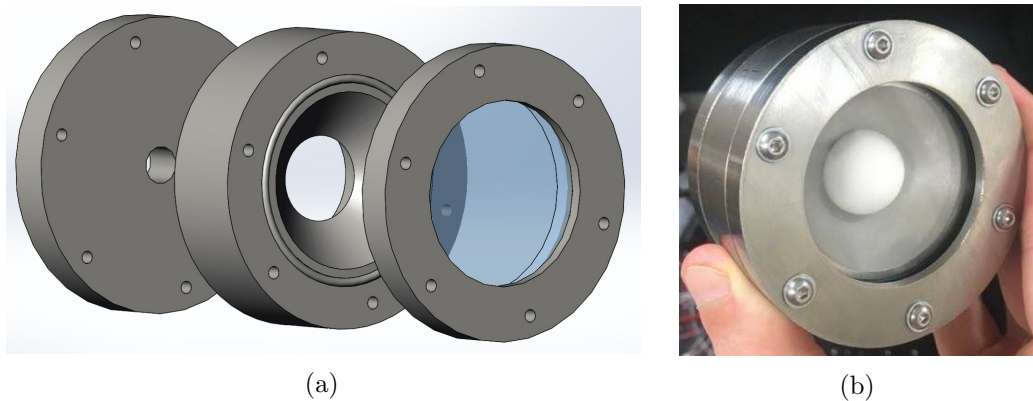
(a) A schematic CAD drawing of the V4 enclosure. (b) A front facing photo of enclosure V4, fully assembled with a sand-blasted stainless steel torch surface.
